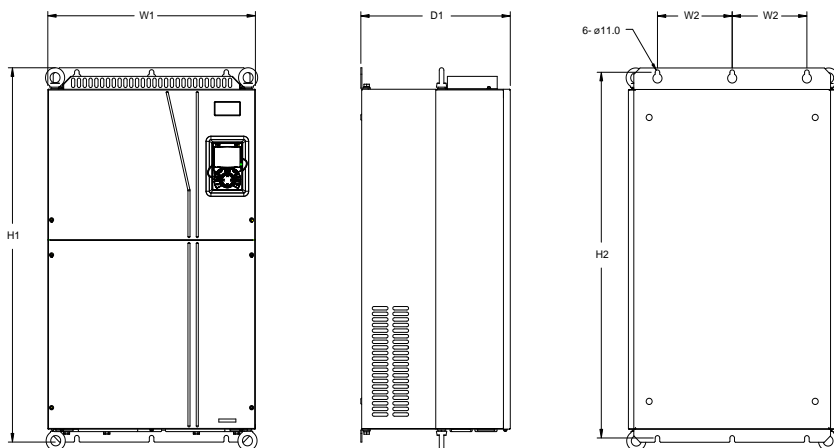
Wall installation diagram of VFDs of 460V 132–200kW
